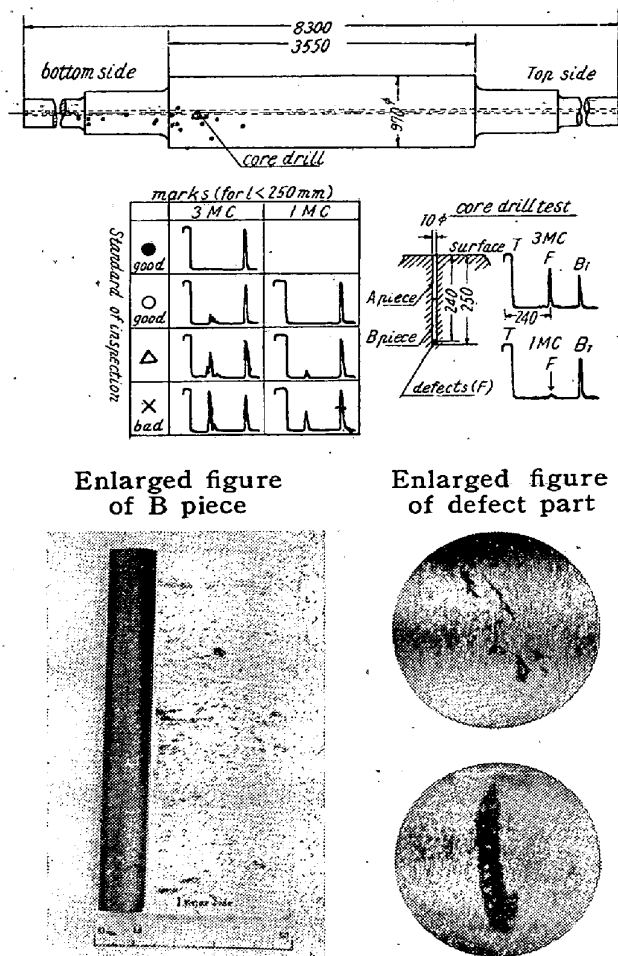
An example of supersonic inspection of a generator-rotor shaft.
